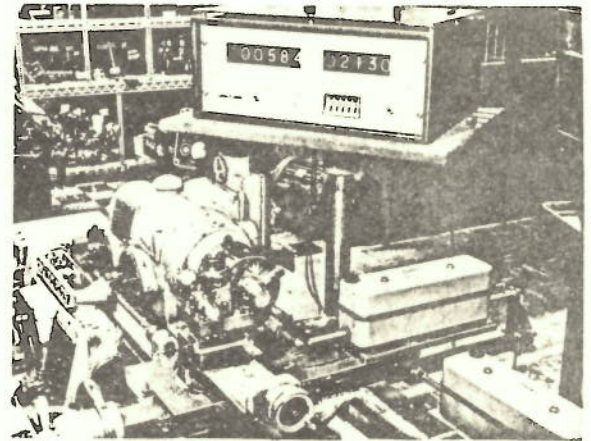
"DIGITURN" MEASURING EQUIPMENT FITTED TO CENTRE LATHE.
